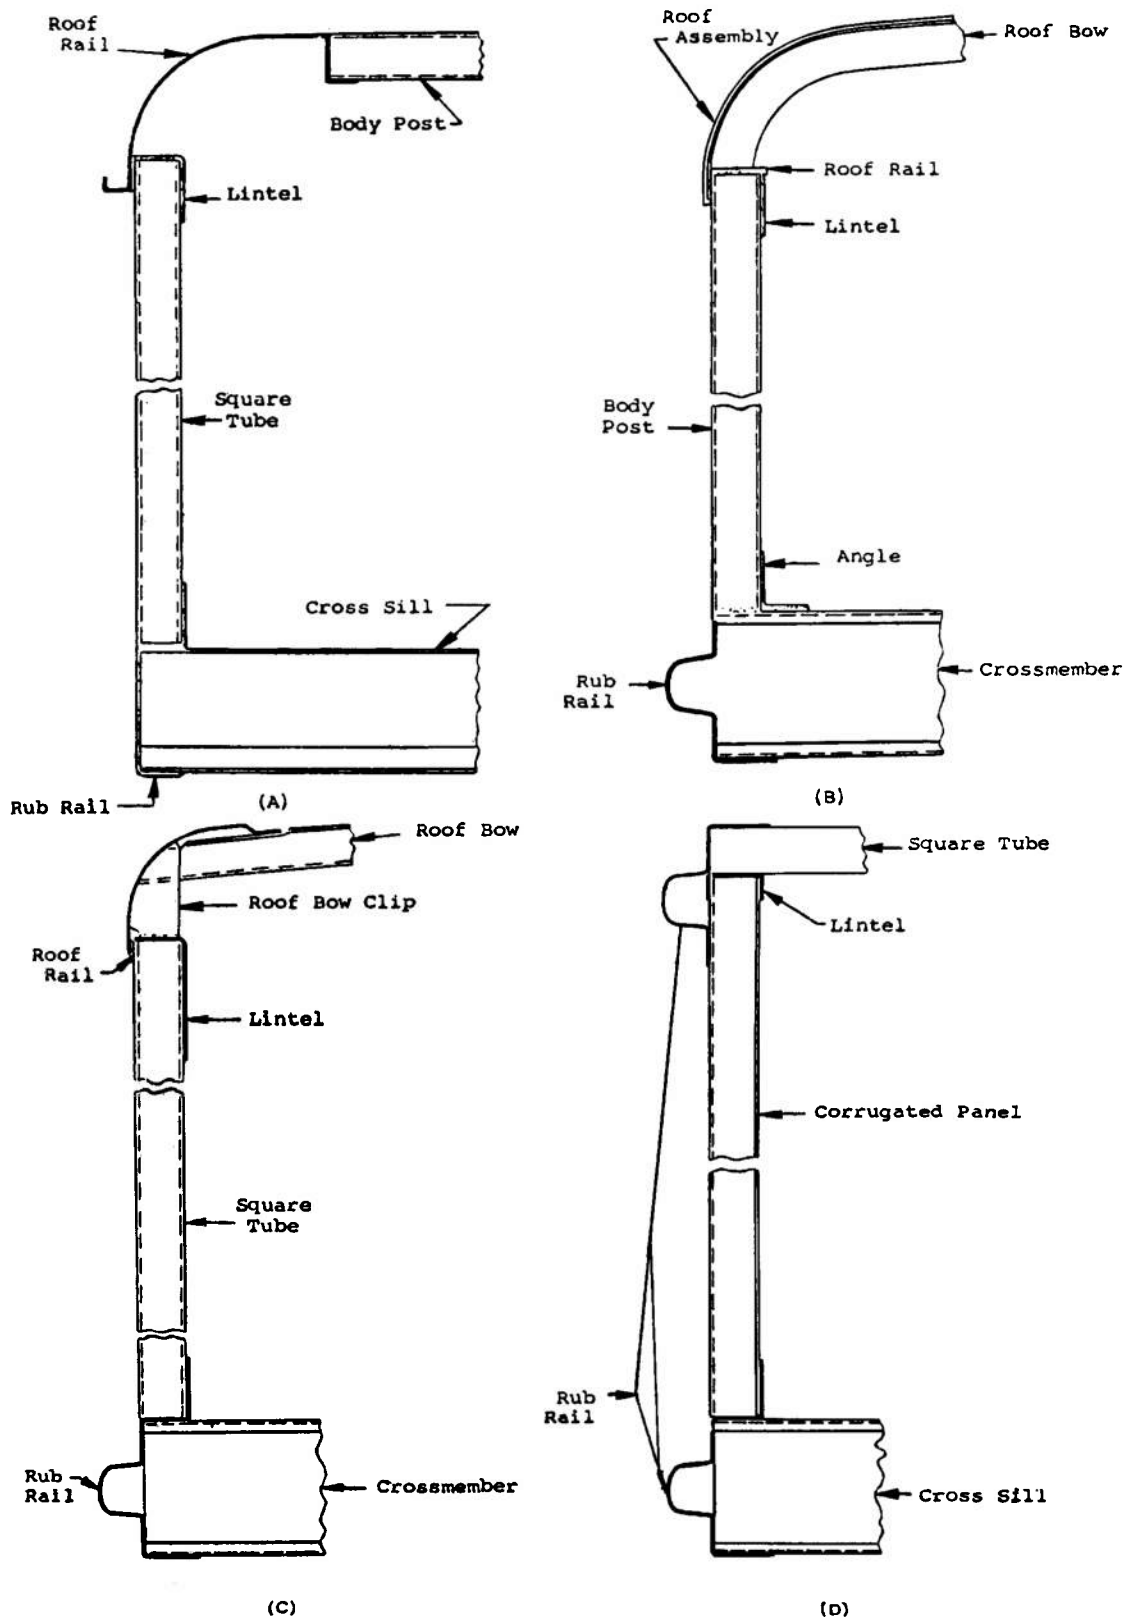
Typical Roof and Wall Construction<sup>105</sup>
